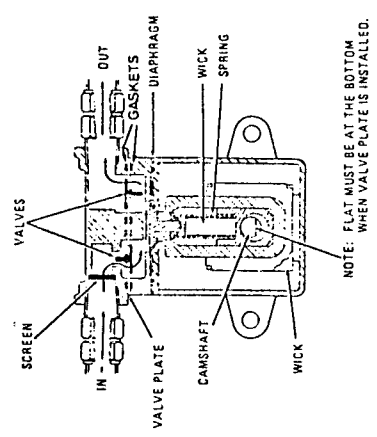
Cross Section of Fuel Pump showing proper valve installation.
